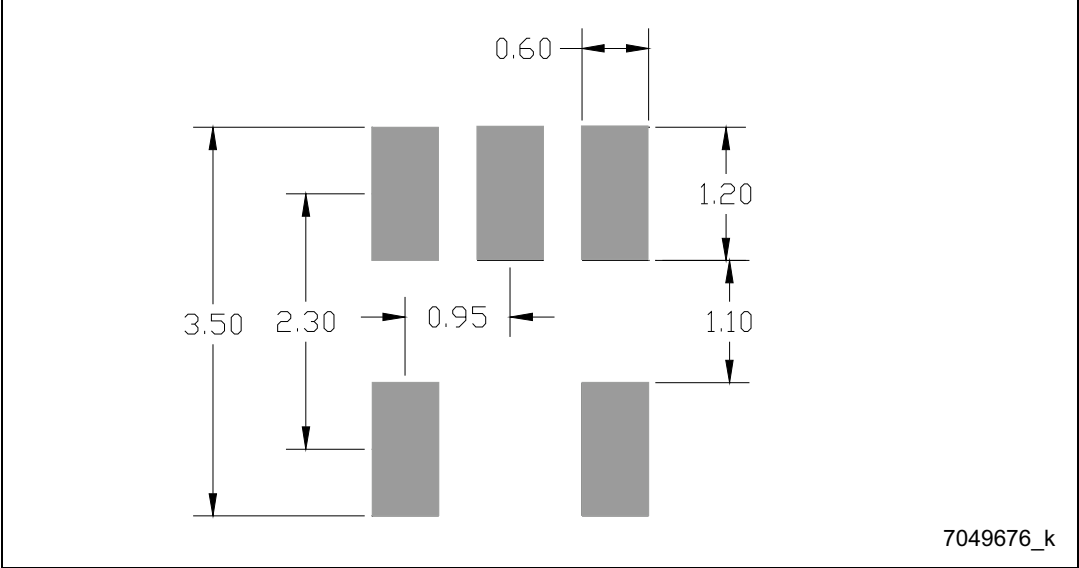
SOT23-5L recommended footprint (dimensions in mm)
